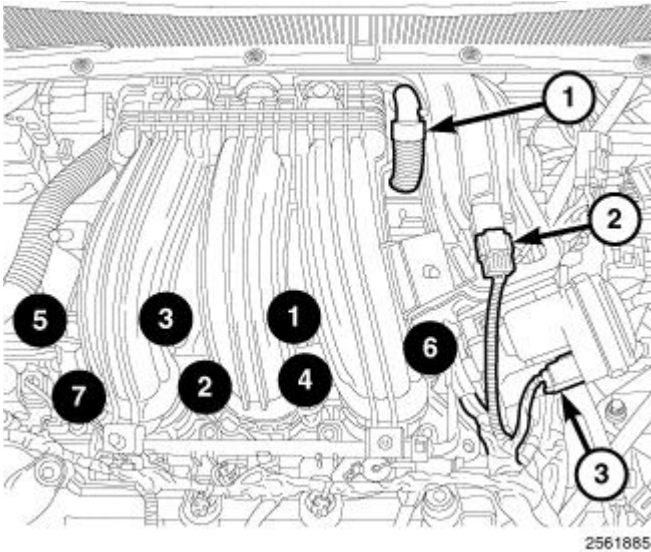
Locating Manifold Bolts, MAP Sensor & ETC Electrical Connectors
